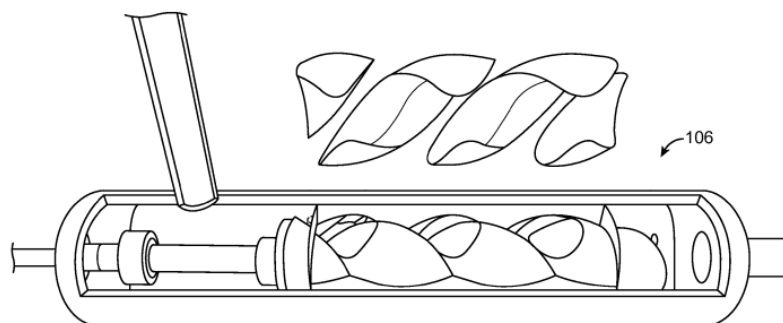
Cut-away view of a progressing cavity pump [20]
